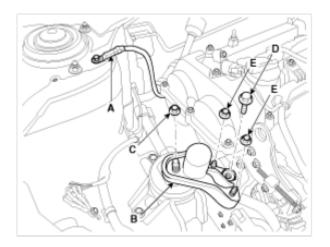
Identifying Engine Mounting Support Bracket, Ground Line, Mounting Bolts And Nuts Courtesy of HYUNDAI MOTOR AMERICA
